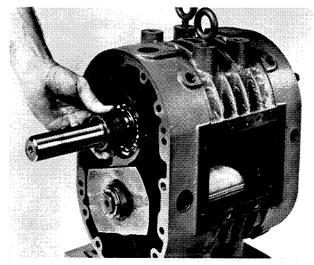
REMOVING BEARING SPACER FROM DRIVE SHAFT
